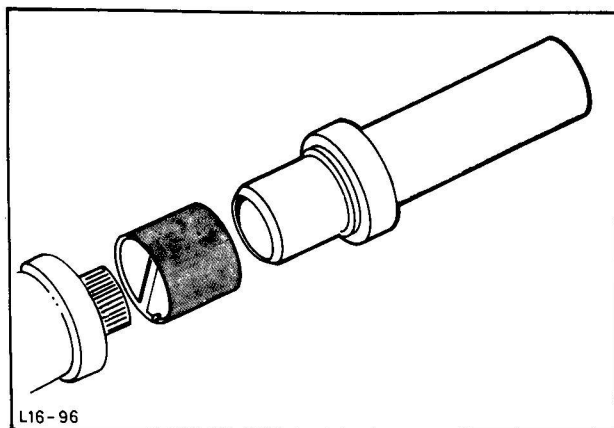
Fit extension housing bush with Special Tool No. 16-016
